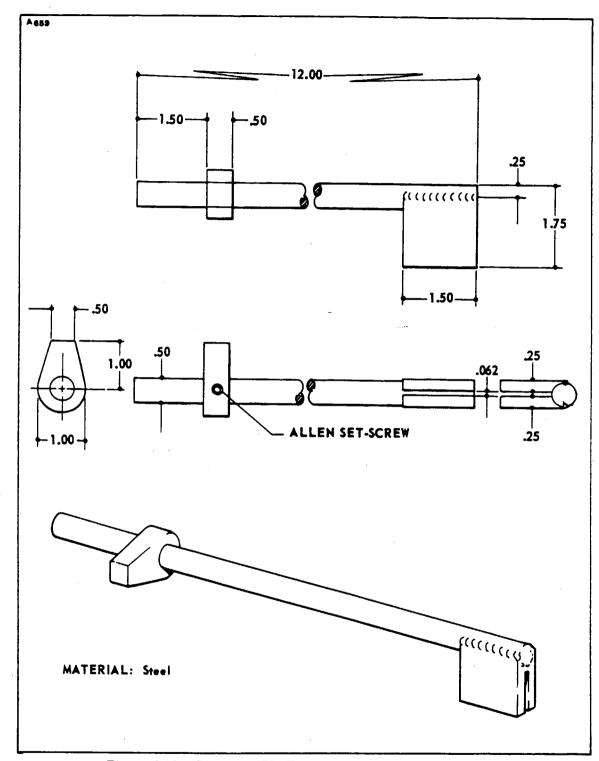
Gear Back-Up Extender Actuator Aligning Tool
